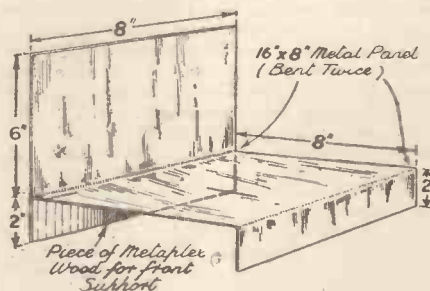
Details of the metal chassis referred to by Lionel Chester this week.
